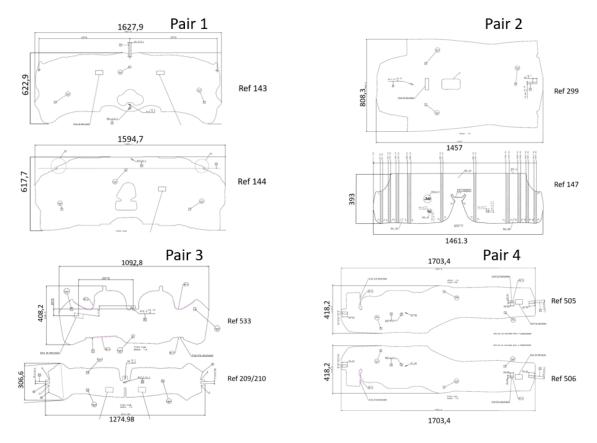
WORKING PAIRS AND BLANK DIMENSIONS
